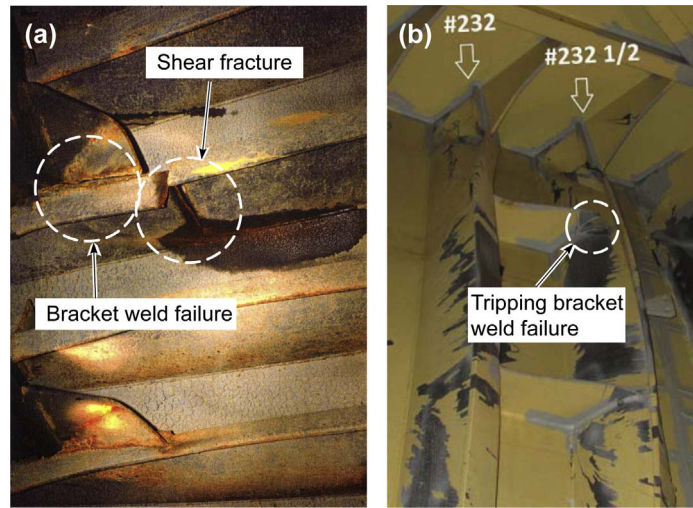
Fracture in framing members as opposed to fracture in outer shell due to ice overload. (a) Bulk carrier – fracture due to shear at the upper end of the frame; figure from Ref. [23]. (b) Cargo carrier – tripping bracket weld failure as a result of frame tripping; Figure from Ref. [24].
